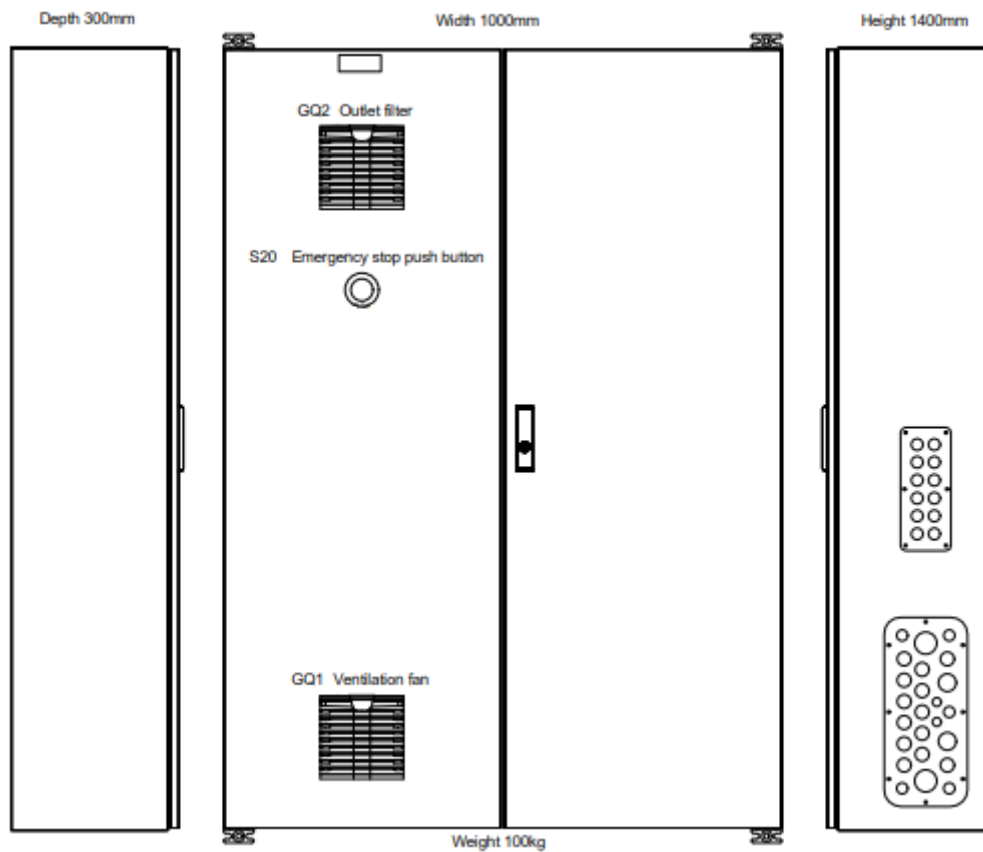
Generating unit control panel drawing of exterior and dimensions /23/.
